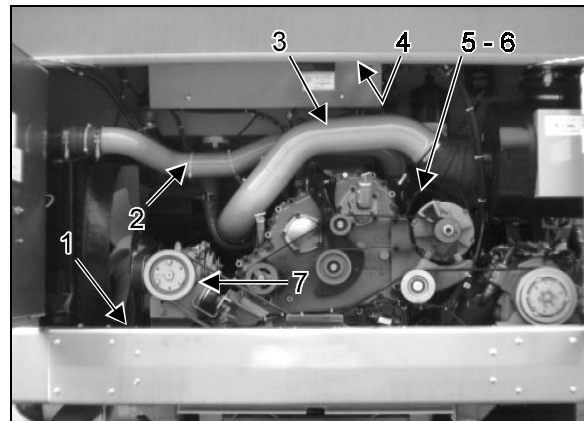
POWER PLANT ASSEMBLY REMOVAL
